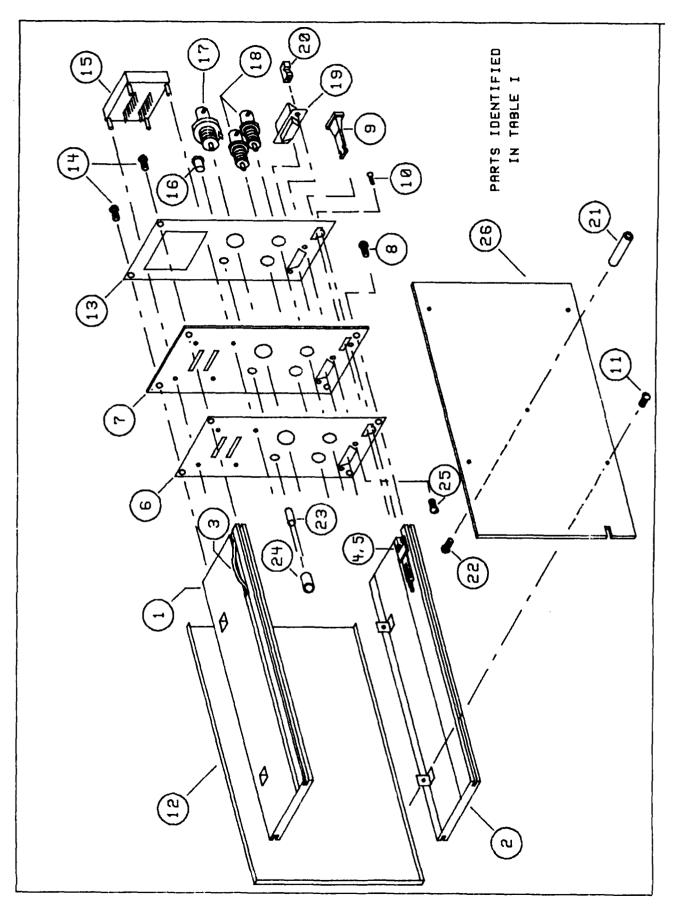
CHASSIS ASSEMBLY GUIDE
